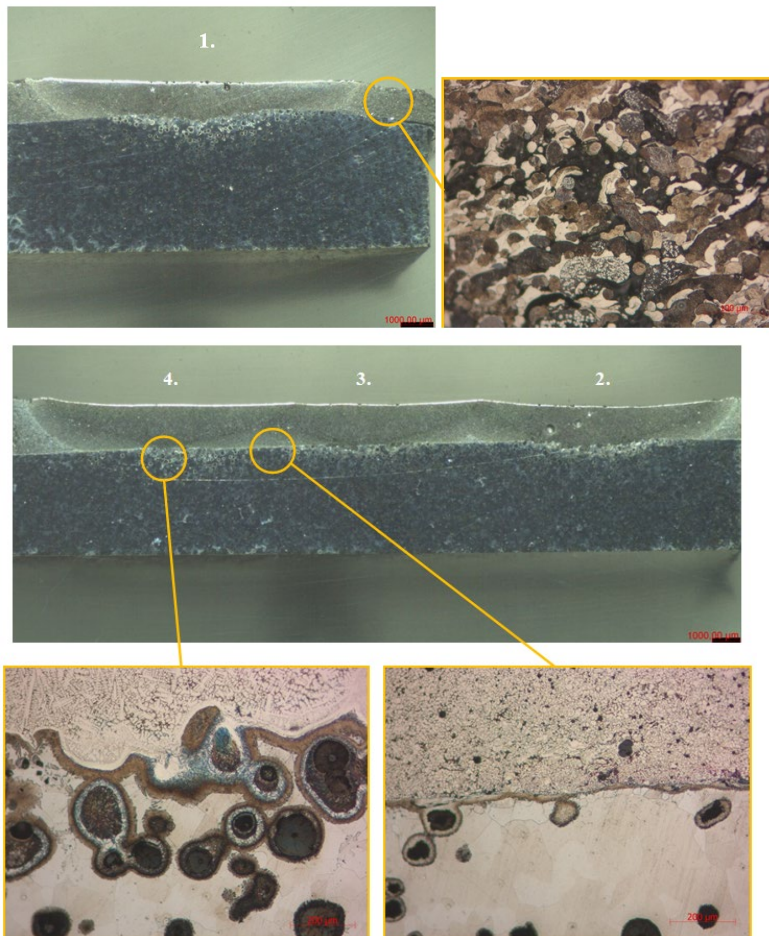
Macrostructure on cross-sections of laser remelted layer
